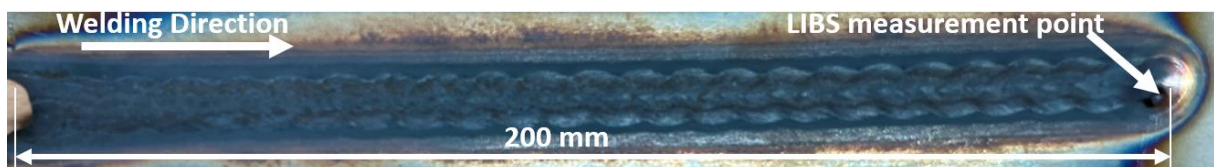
Finished weld seam of the Sample 4, LIBS measurement spot on the weld end crater is marked.
